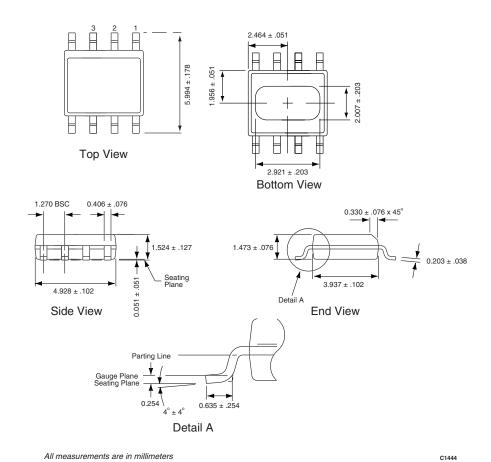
CX65002 8-Pin SOIC Package Dimensions
